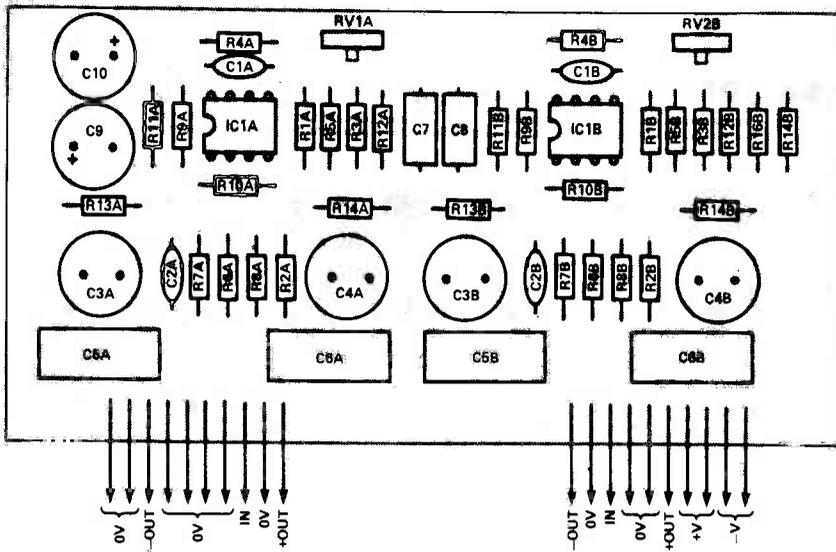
Overlay of the PCB for the balanced output driver — this is a stereo board, so only one is required, but note the components that you have to obtain two of.
